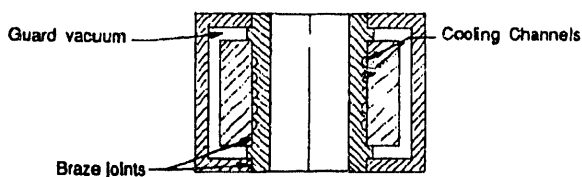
Fixed Mask cross-sectional view perpendicular to the photon beam.
